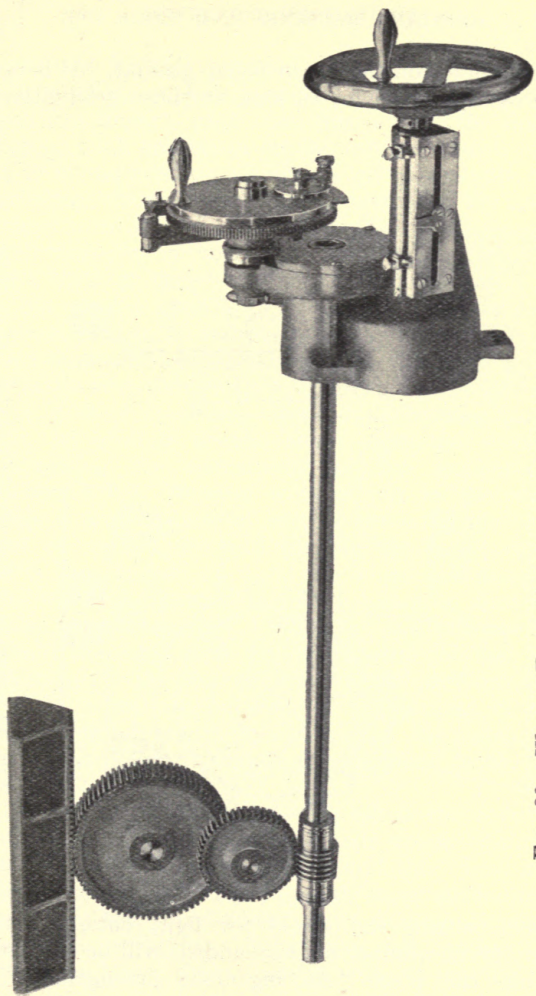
WHEEL FEED MECHANISM OF CHURCHILL PLAIN GRINDER
